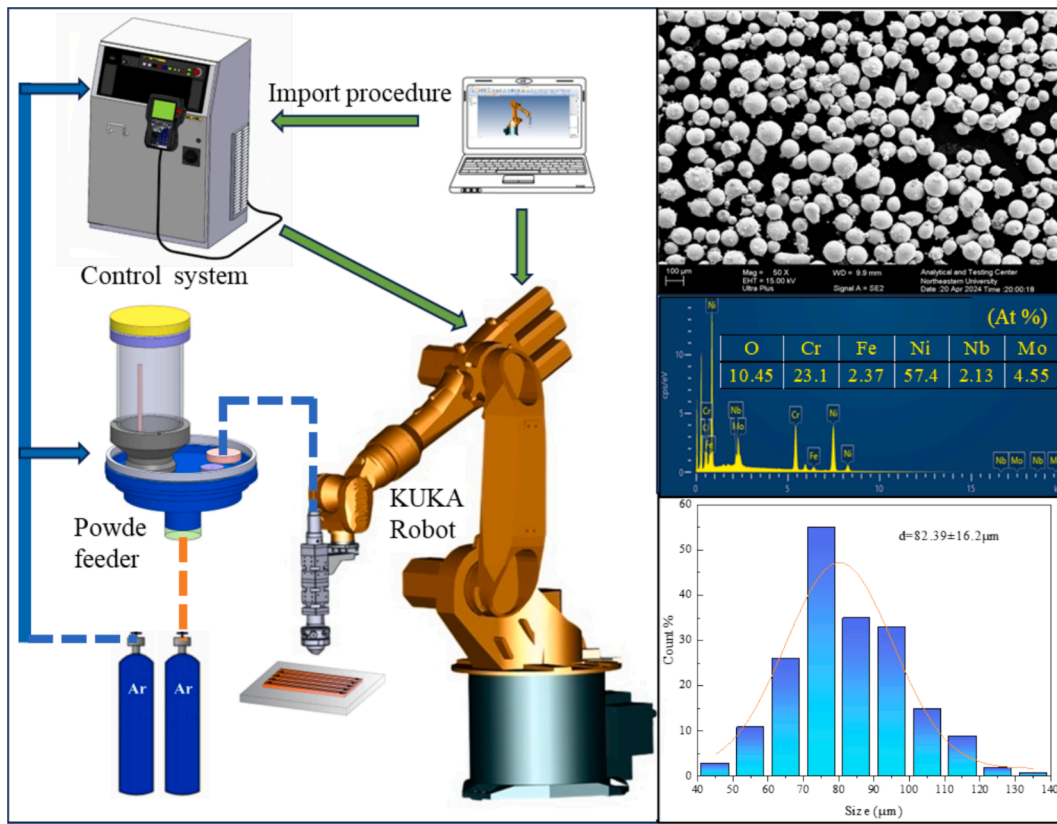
Laser cladding preparation process and morphology of deposited material.
